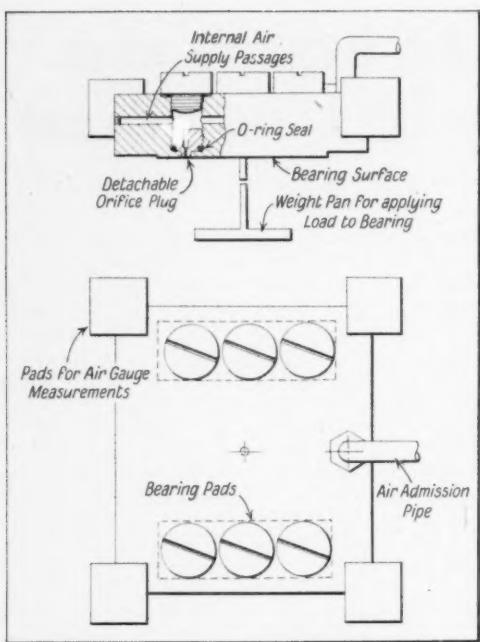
Sectional and plan views of the flat air bearing of the experimental set-up, Fig. 1
